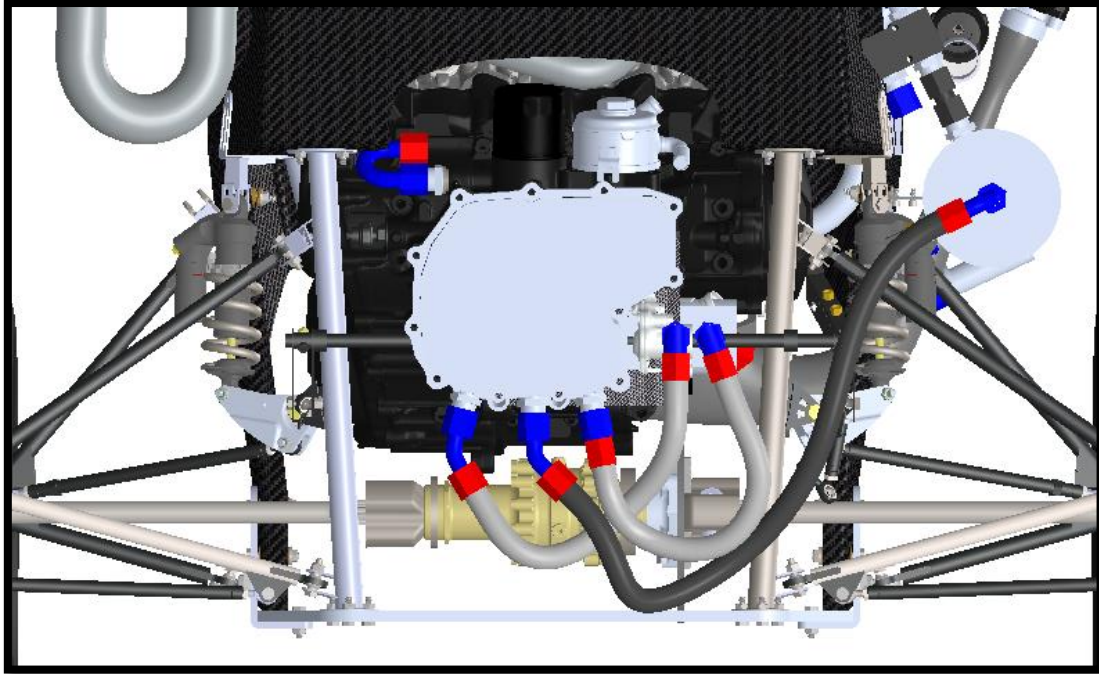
BR21 rear end cap and steel mounting bars bottom view
